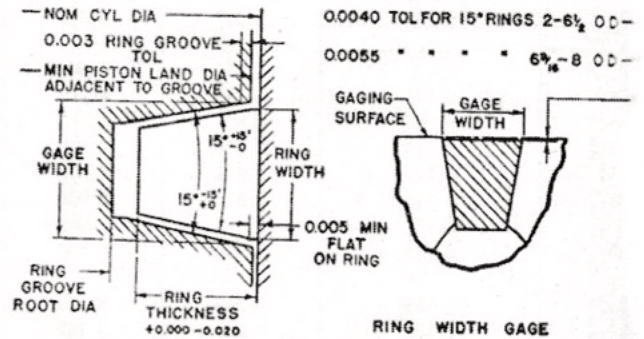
KEYSTONE-RING DIMENSIONS AND TOLERANCES
